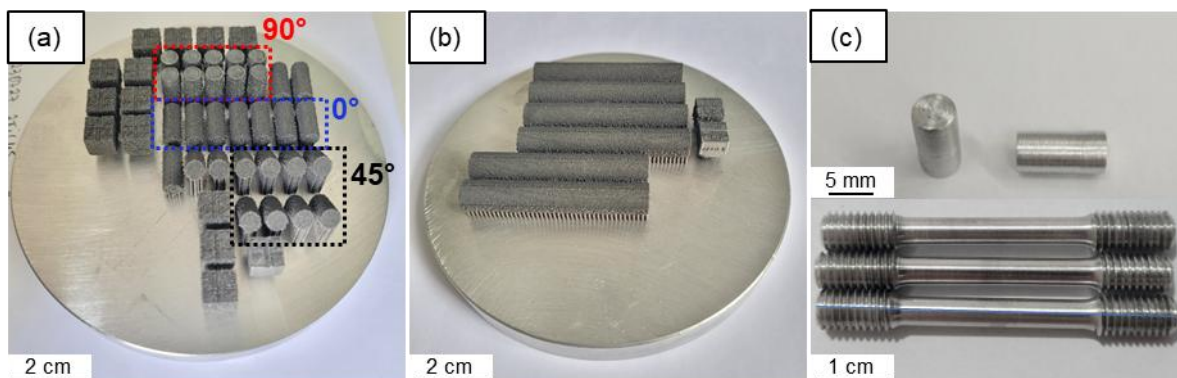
L-PBF processing of samples from (a) compression and (b) tensile tests, and (c) machined specimens for compression and tensile tests.
